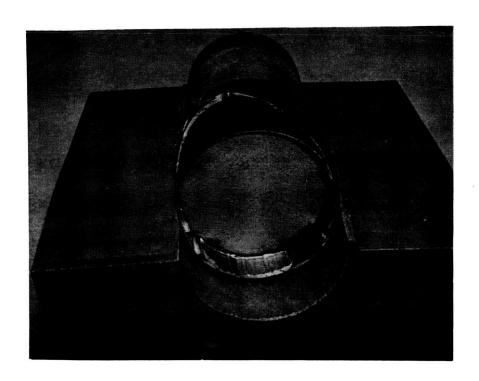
CUT-AWAY VIEW OF MOLD CONTAINING CALCINED PETROLEUM COKE SAMPLE PRESSED AT 3000°C, SHOWING SHEAR FRACTURE AND MATERIAL EXTRUSION AROUND PLUNGER
